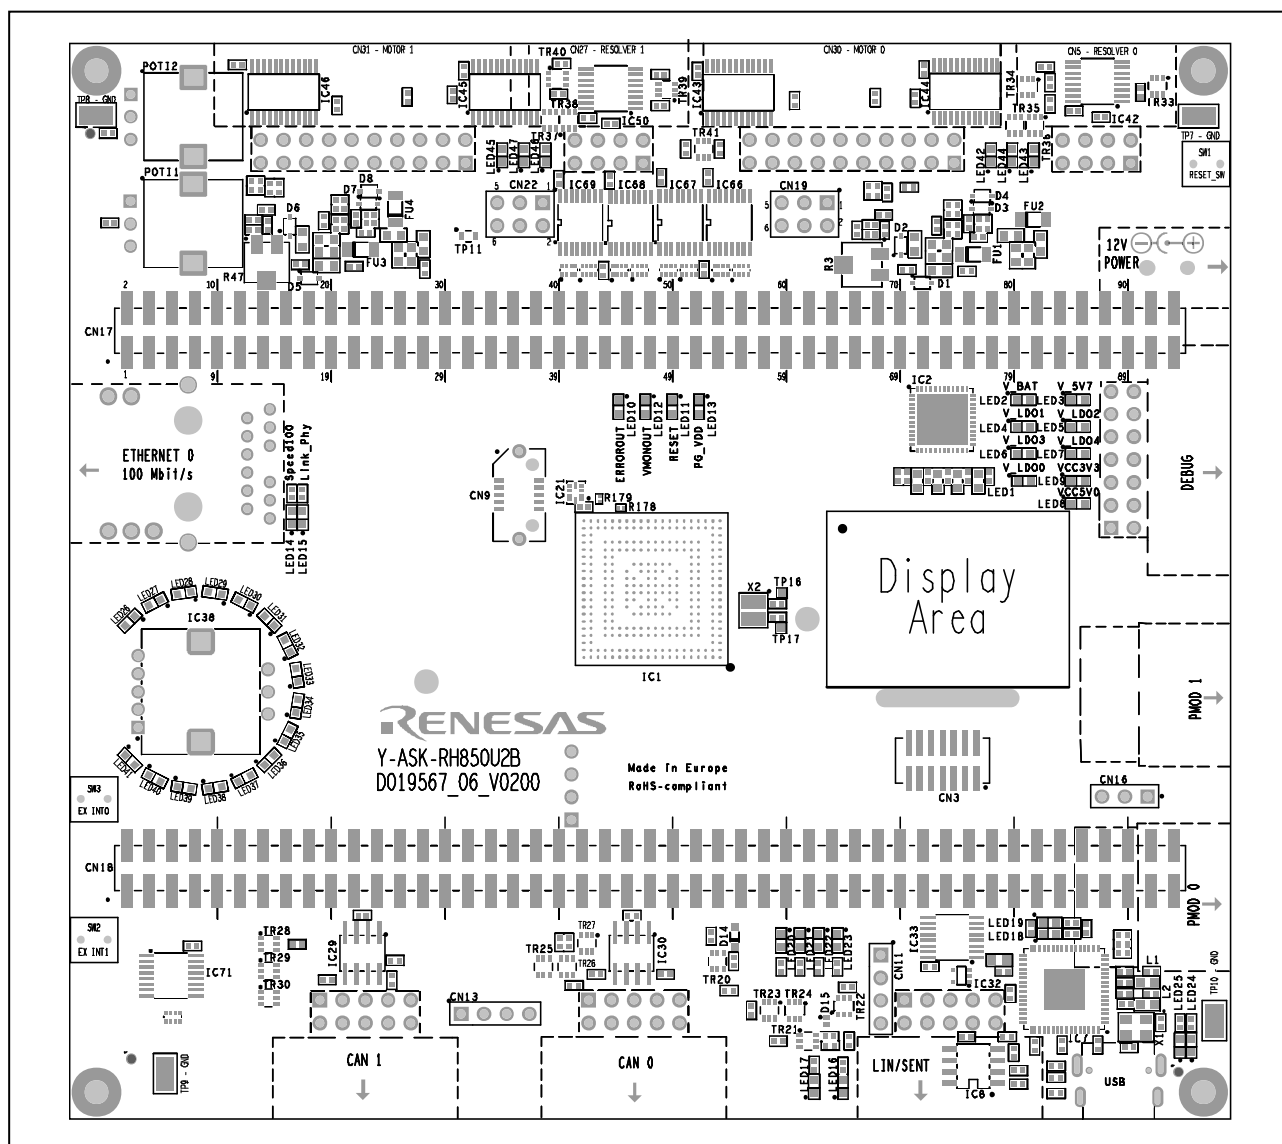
Starter kit board top view for board version D019567_06_V0200
